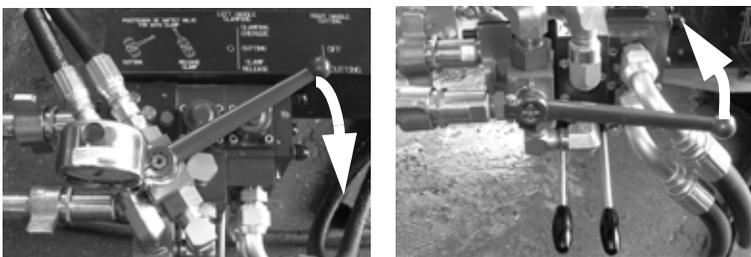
Open the clamping circuit valves to allow the clamping drive to engage.
